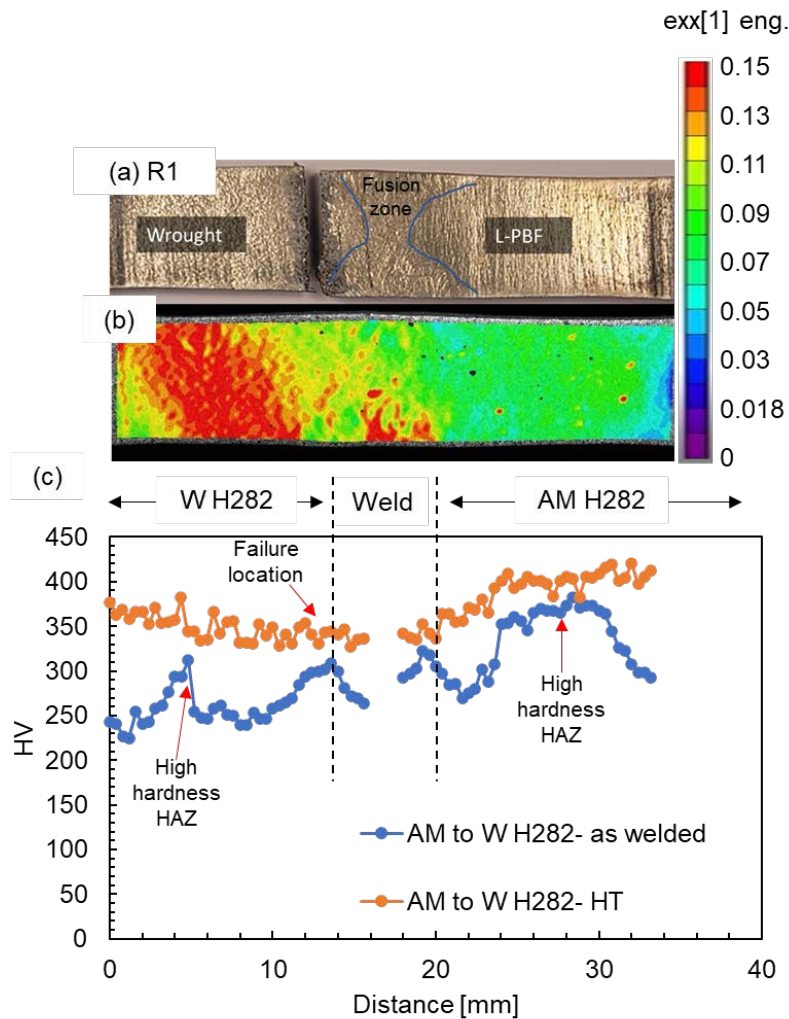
(a) macrograph for one AM to wrought weld sample labeled R1 (fully aged), (b) DIC map for engineering strain just before fracture in RT tensile testing for R1 sample, (c) hardness line profile for the as-welded and fully aged (HT) samples
